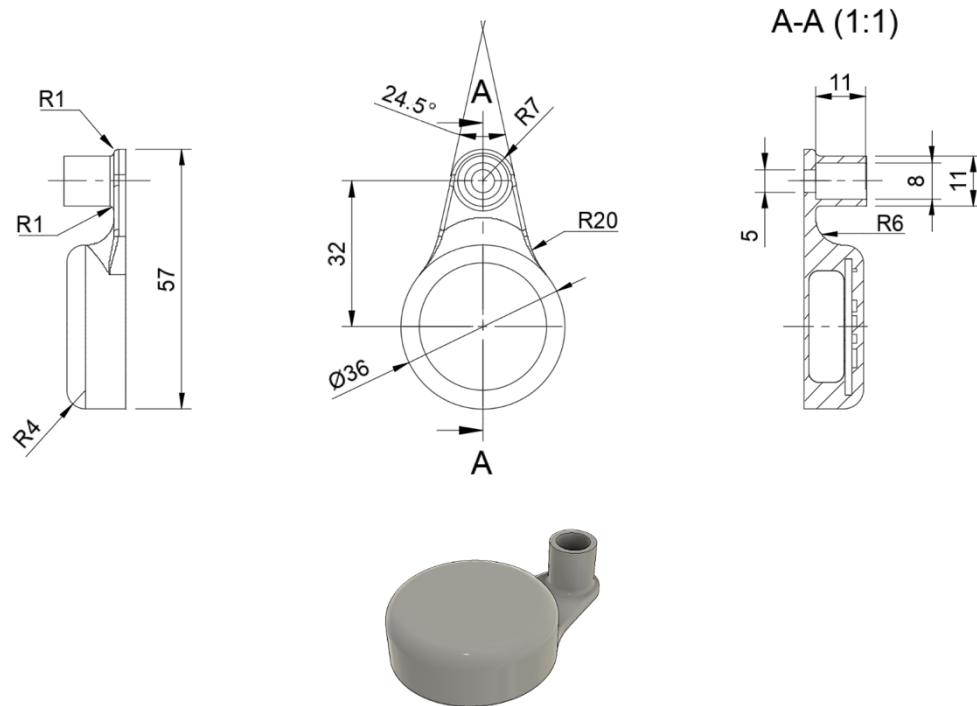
Technical Drawing, Constructed for FDM 3D-printing.
